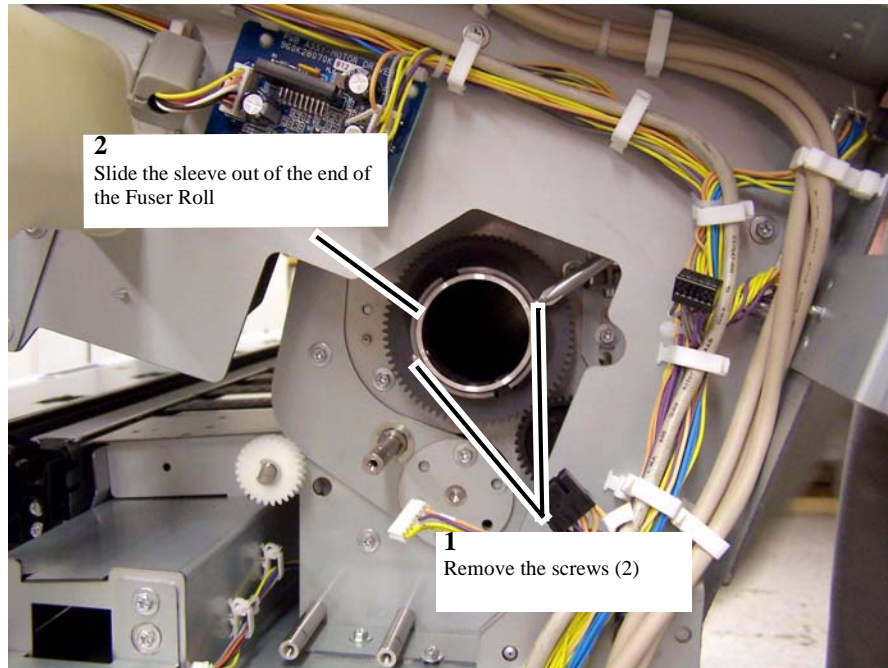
Removing the sleeve from the right end of the Fuser Roll
